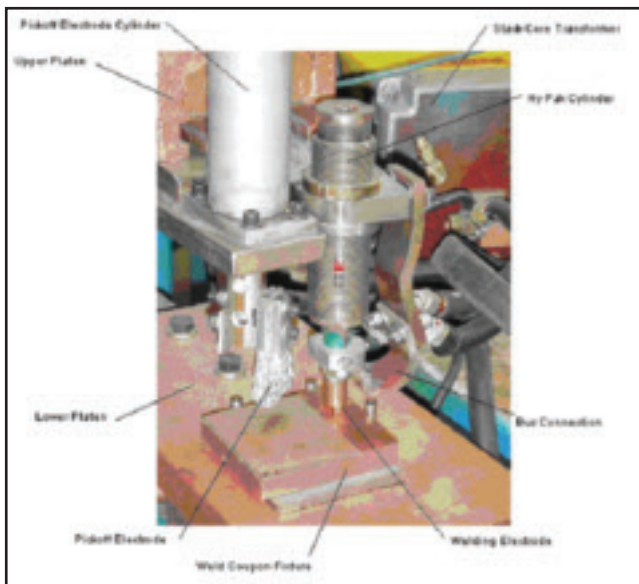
Physical layout of the HYPACK® system used for projection welding aluminum alloys. Figure taken from Ref. 36.
